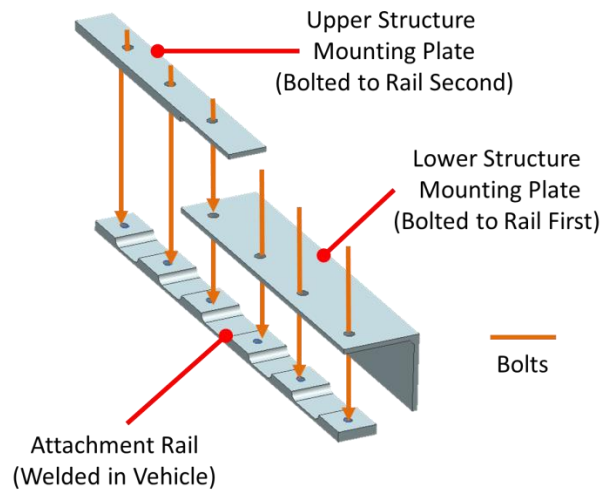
Attachment rail, upper and lower structure mounting (driver side)
